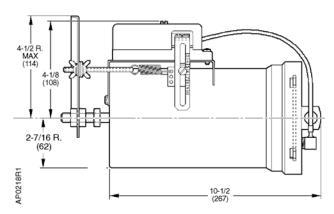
Dimensions with the RL 147 Positioning Relay Mounted.
